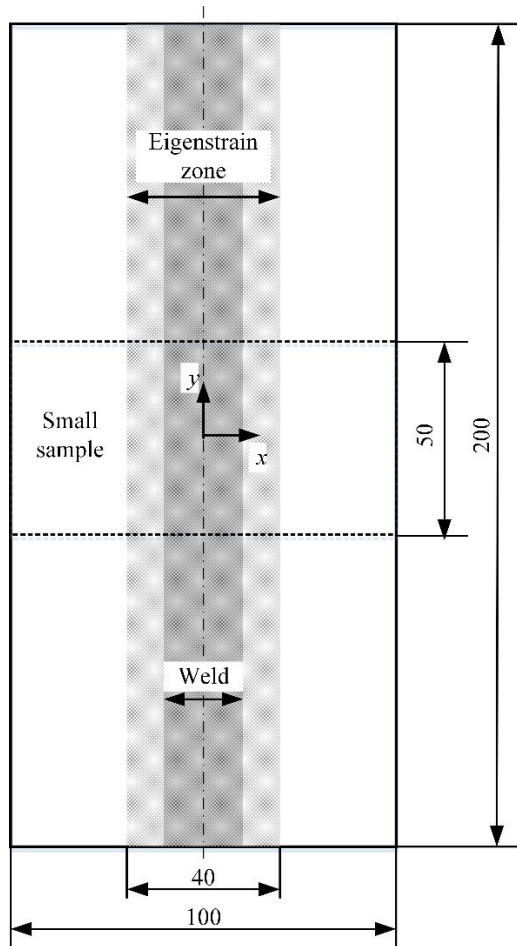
Specimen configuration and dimension, and cutting position for the smaller sample (Unit: mm).
